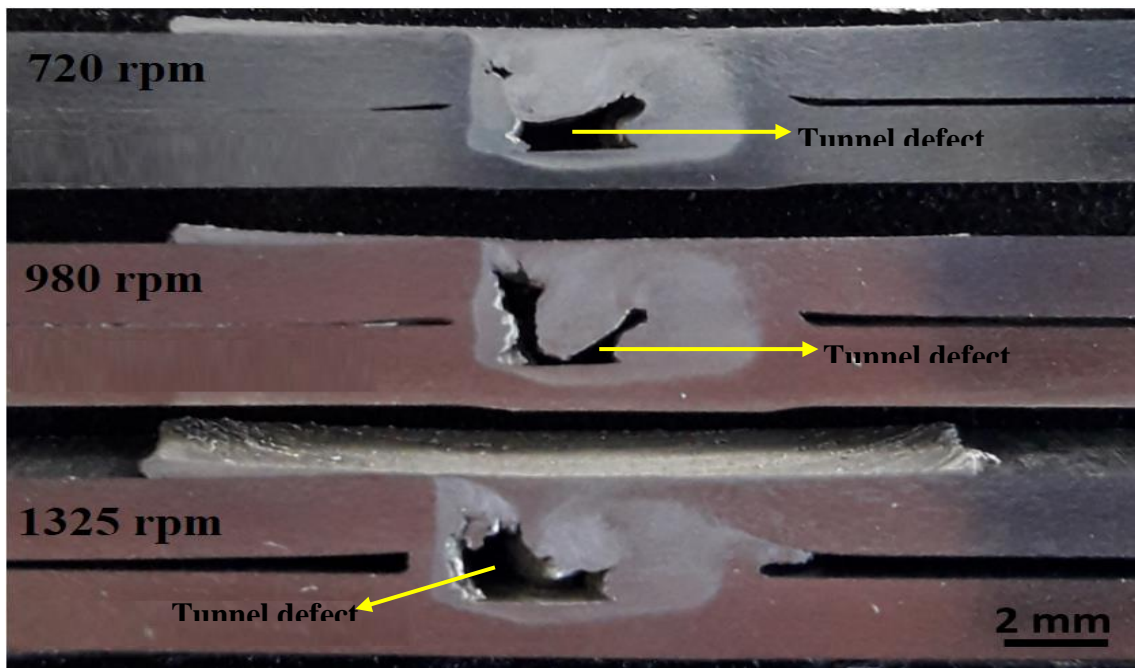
Cross-sectional view of the FSLW welds produced at different tool rotation speeds
